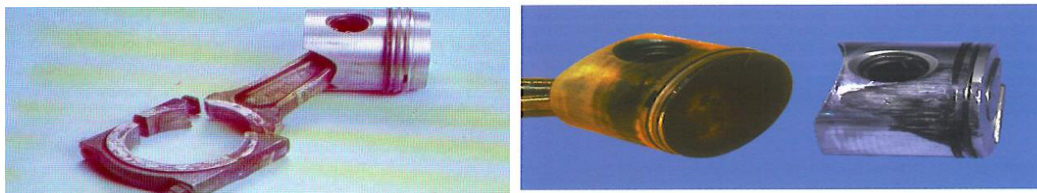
Damaged pieces-broken winch and piston from an overheated compressor
